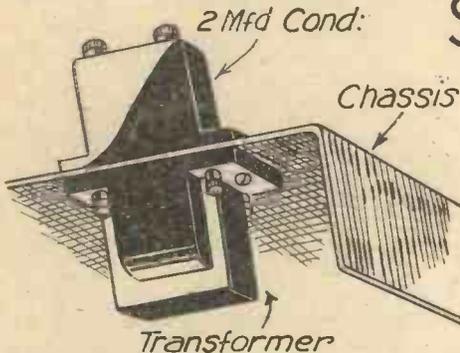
Simplification of mounting components by standardized spacing of fixing holes.
